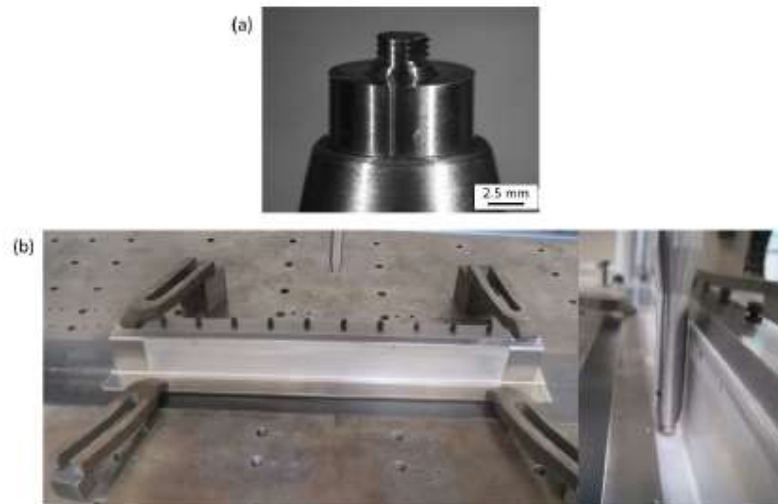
(a) FSW tool and (b) Setup for the FSW process.
